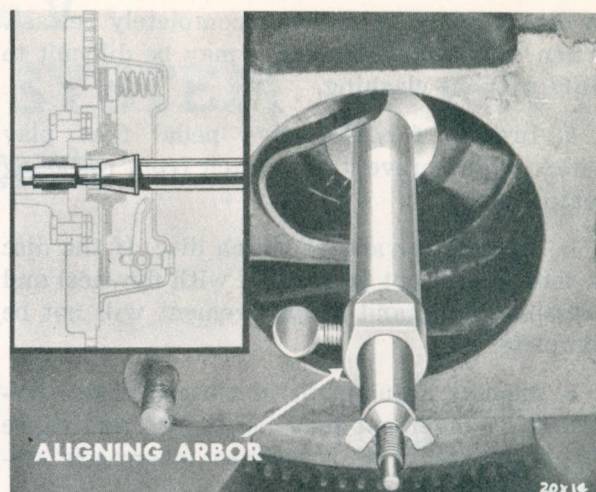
Clutch Disc Aligning Arbor (Tool C-360) Installed
